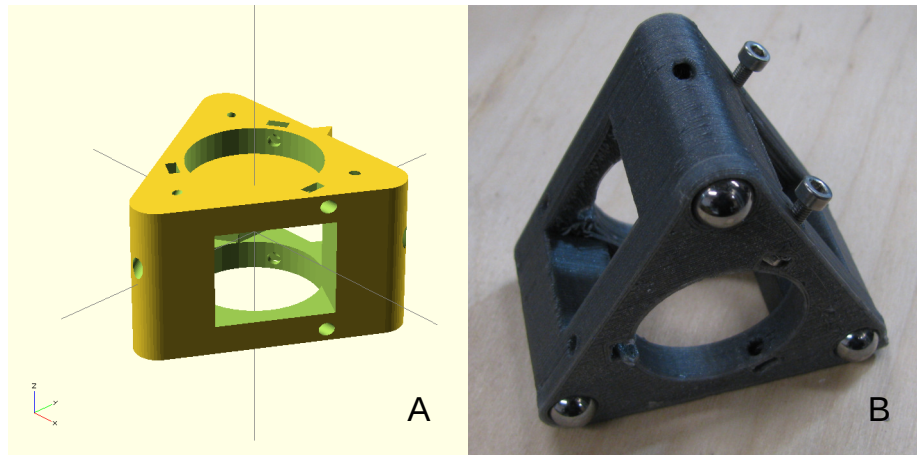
A) OpenSCAD STL rendering of USB microscope holder, B) Assembled USB microscope holder with ball bearings and screws.
